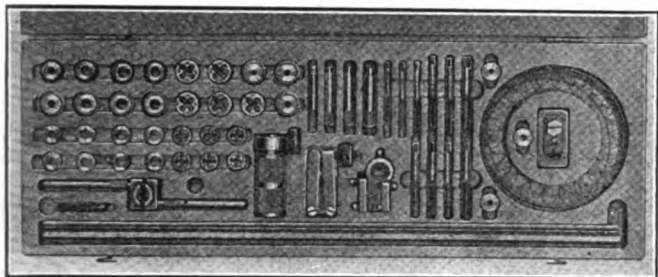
RAMSDELL HAND VISE-LATHE SET
